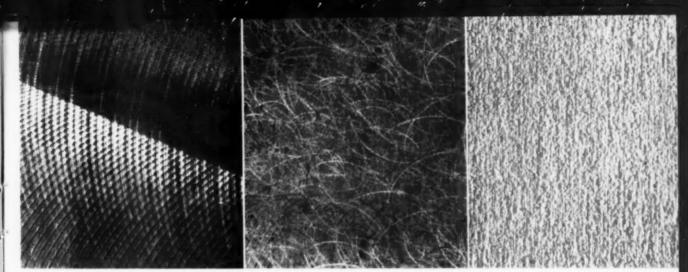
Representative Surfaces, Magnified Five Times. Left is machine-milled; center is machine-milled and polished; right is chem-milled
